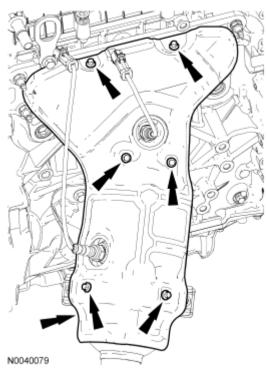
Locating Catalytic Converter Bracket Bolts Courtesy of FORD MOTOR CO.
